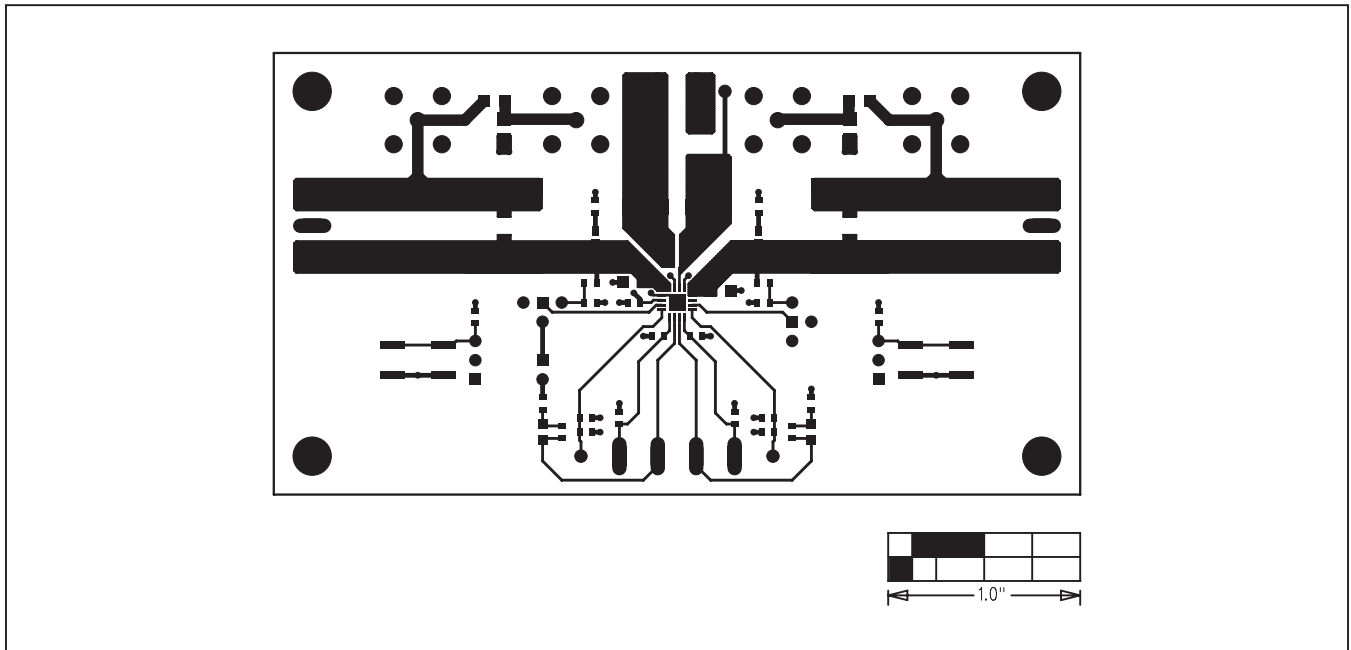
MAX16948 EV Kit PCB Layout—Component Side
